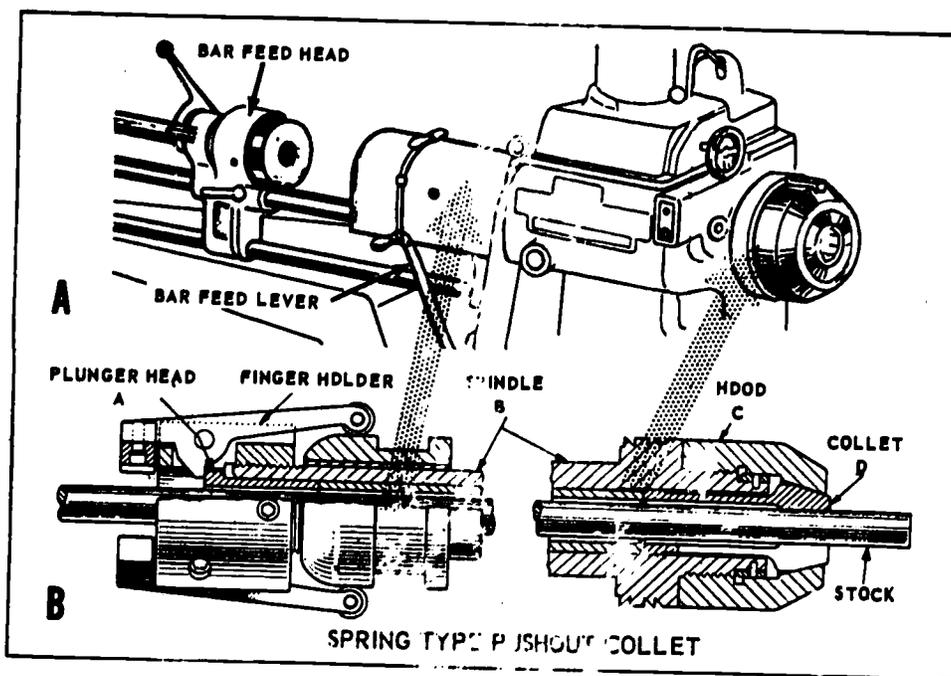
Bar feed device and spring type pushout collet mechanism.
